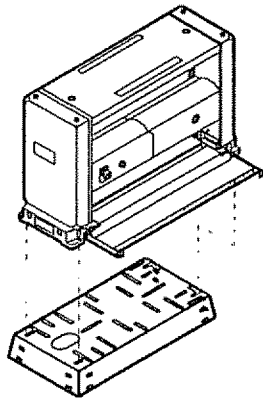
12½" Thickness Planer shown on top section of Optional Multi-Purpose Stand Model No. 22250
